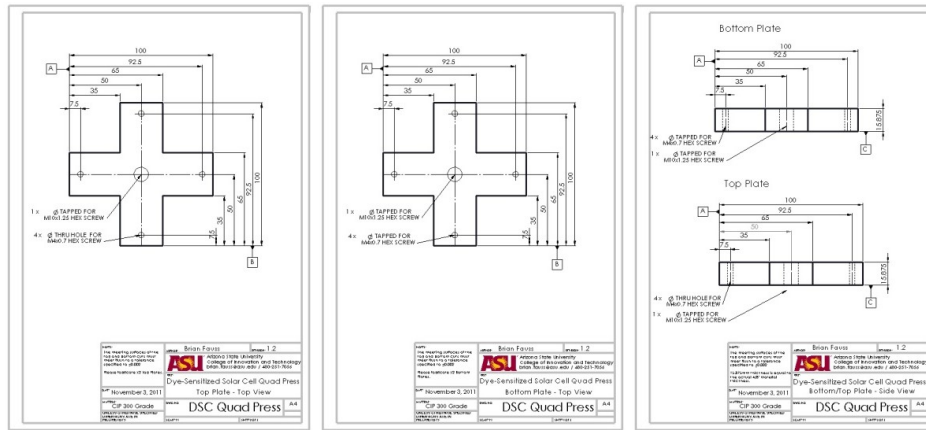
SolidWorks® 2012 drawings of assembly presses
